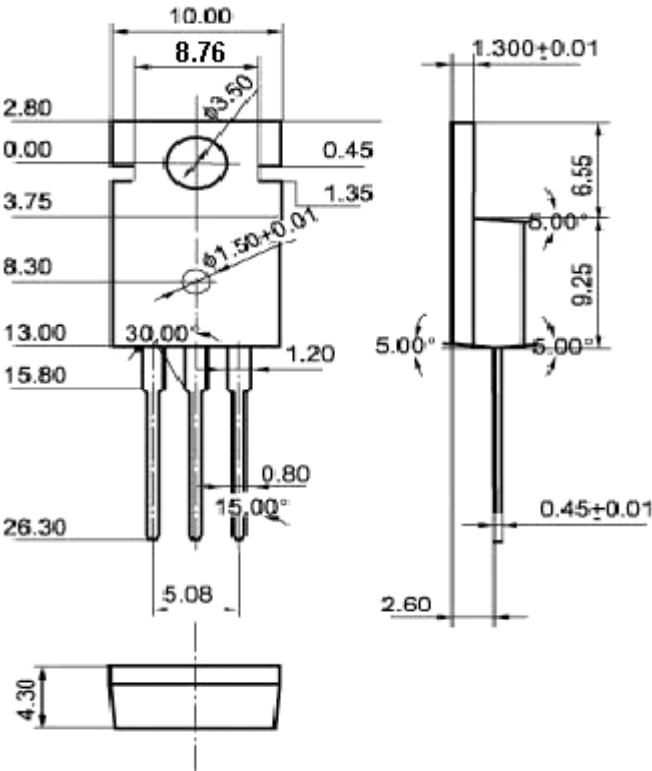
Outline dimensions (unindicated tolerance:±0.10mm)
